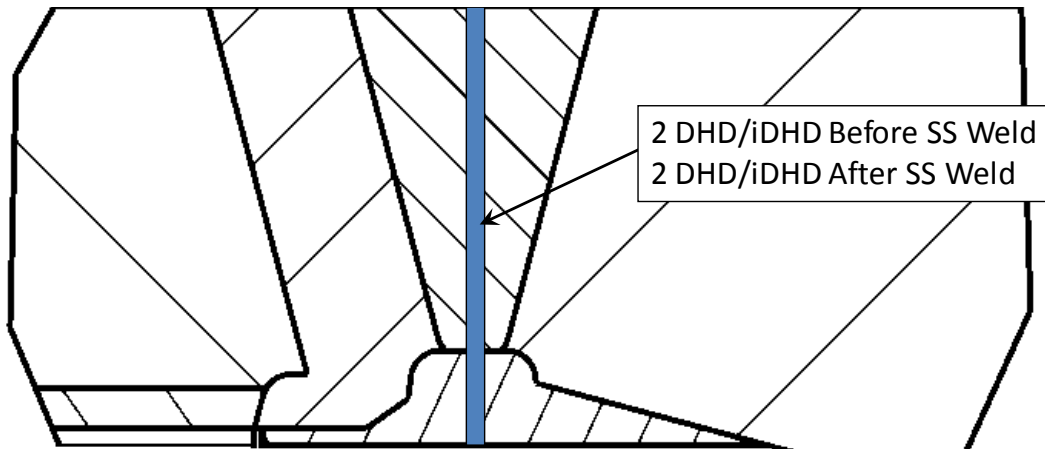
Weld Residual Stress Measurement Location
